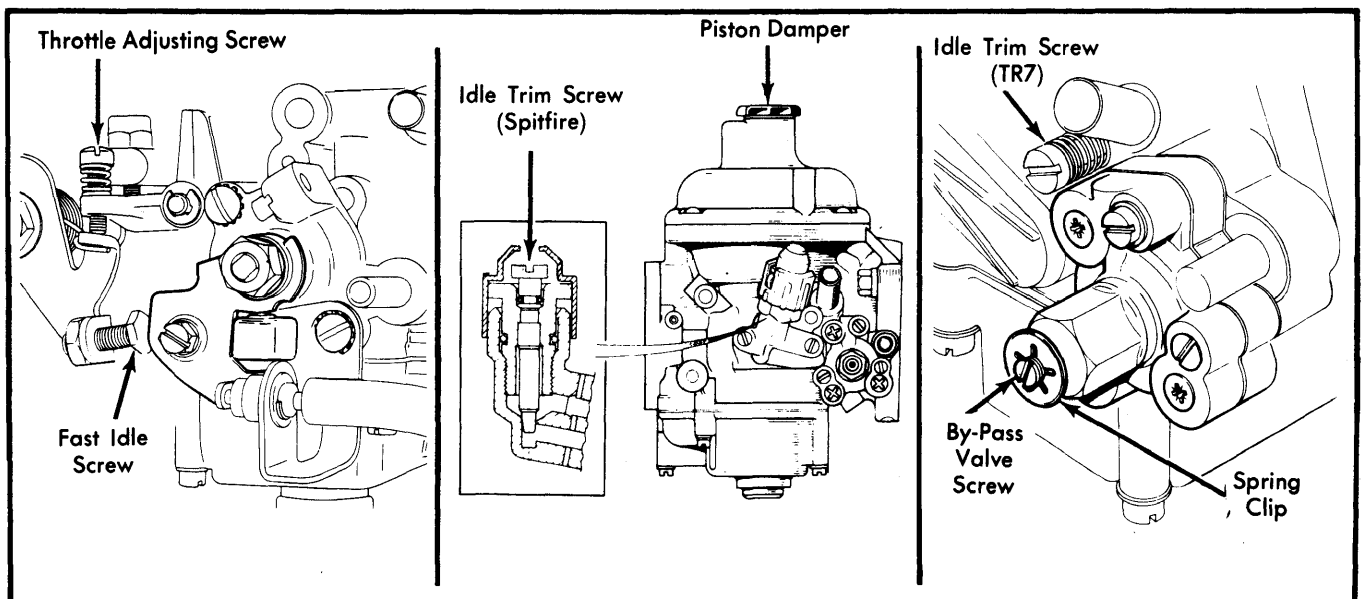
Screws for Adjusting Idle Speed, Mixture, & Decel Valve (Carbureted Models Only)
